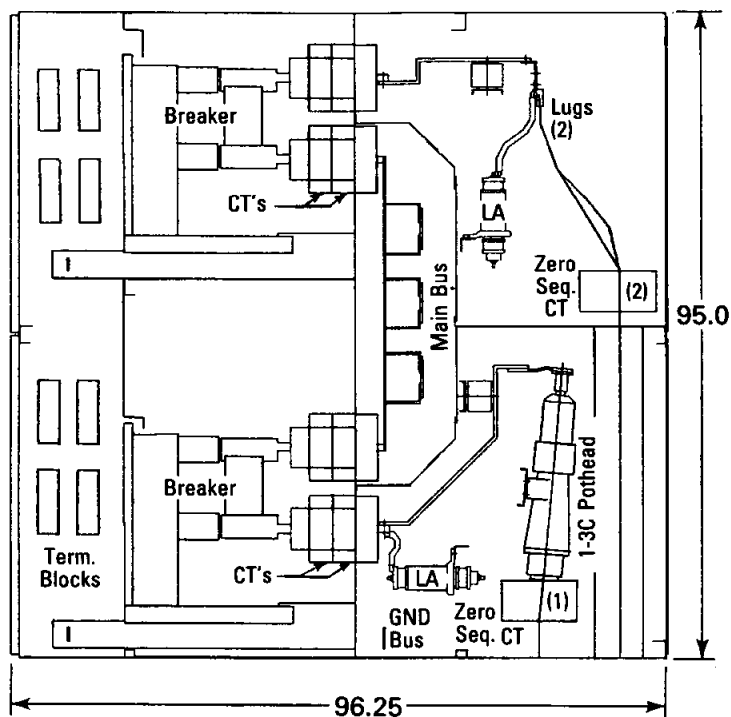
In. Wide Typical Breaker/Breaker Vertical Section
